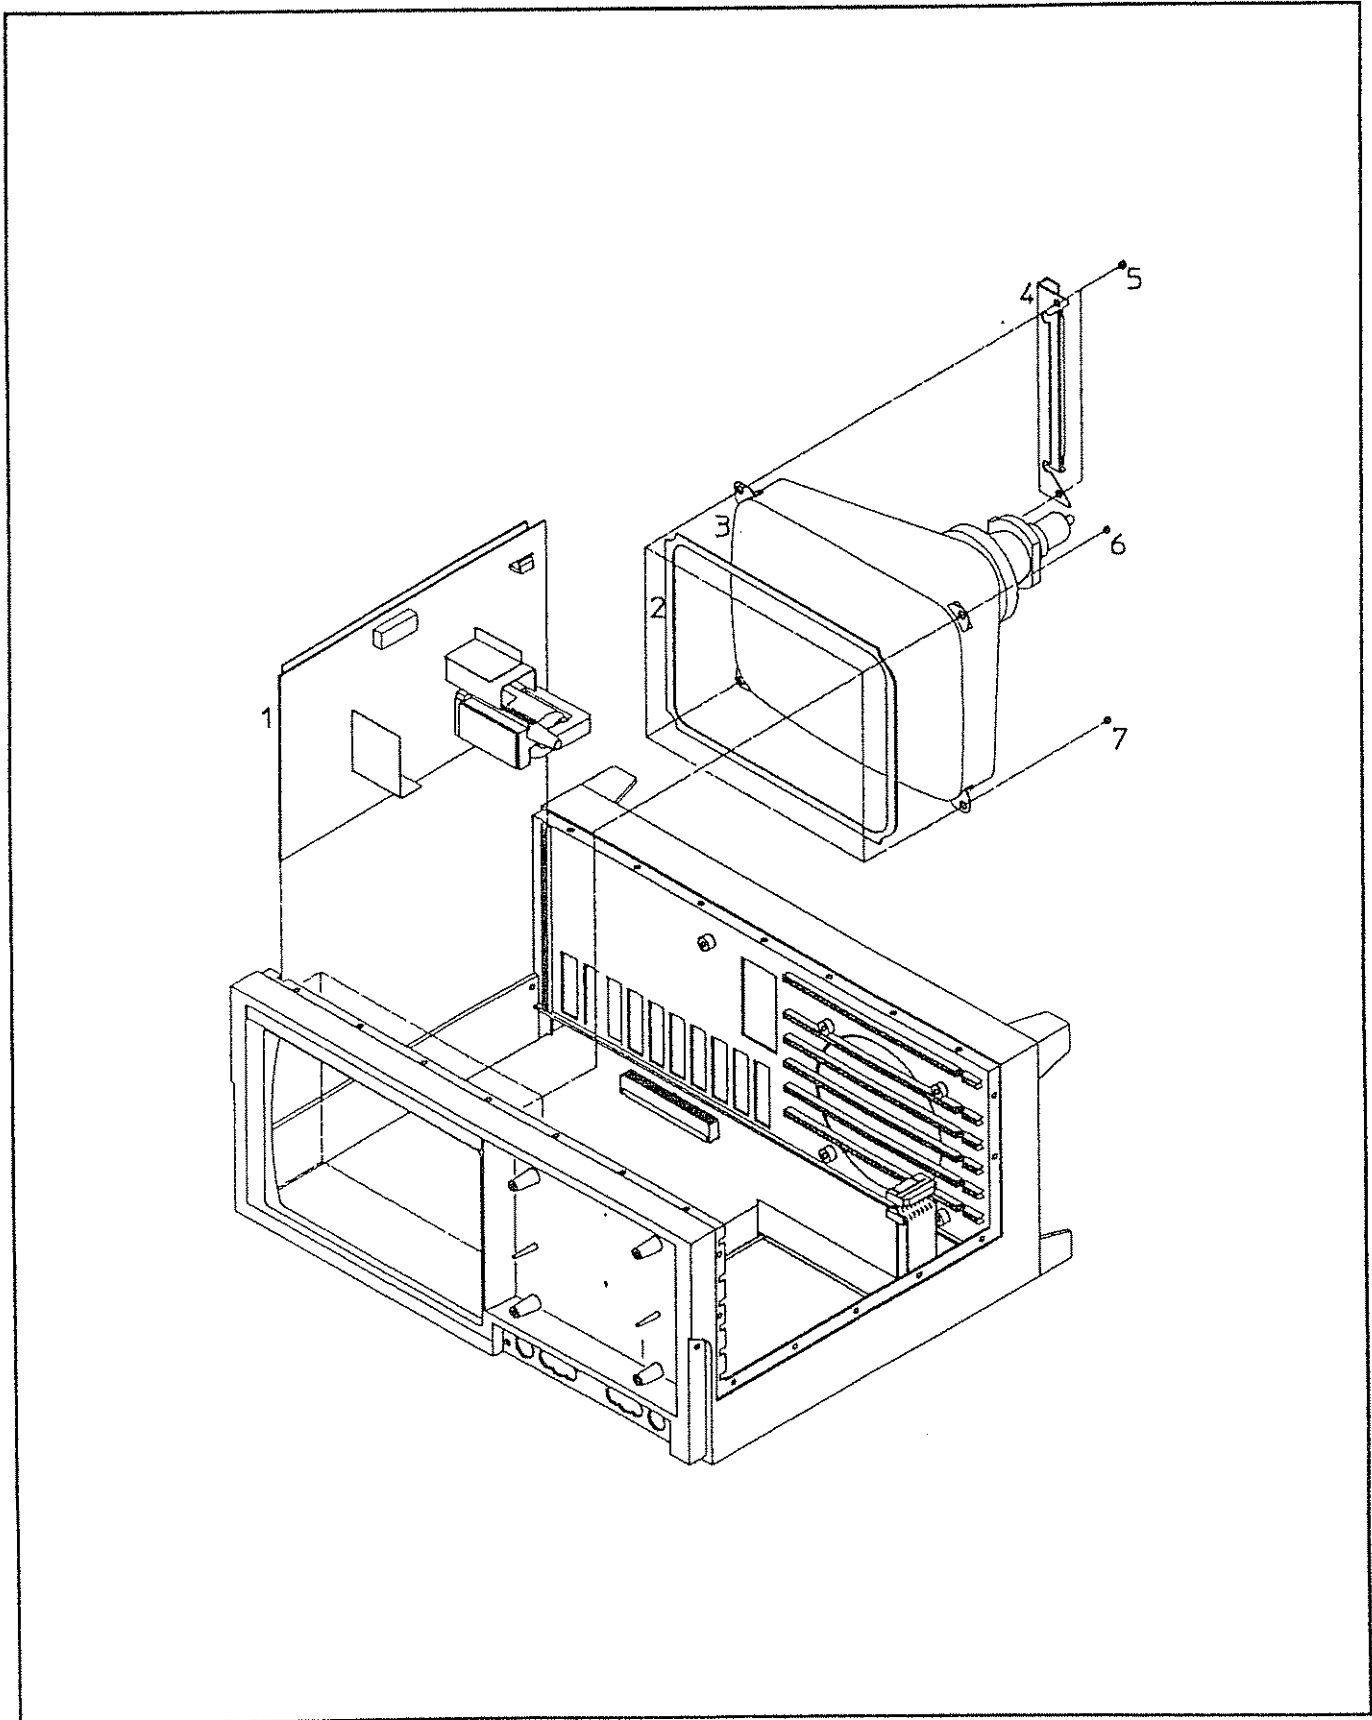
CRT and CRT Driver Board Illustrated Parts Breakdown
